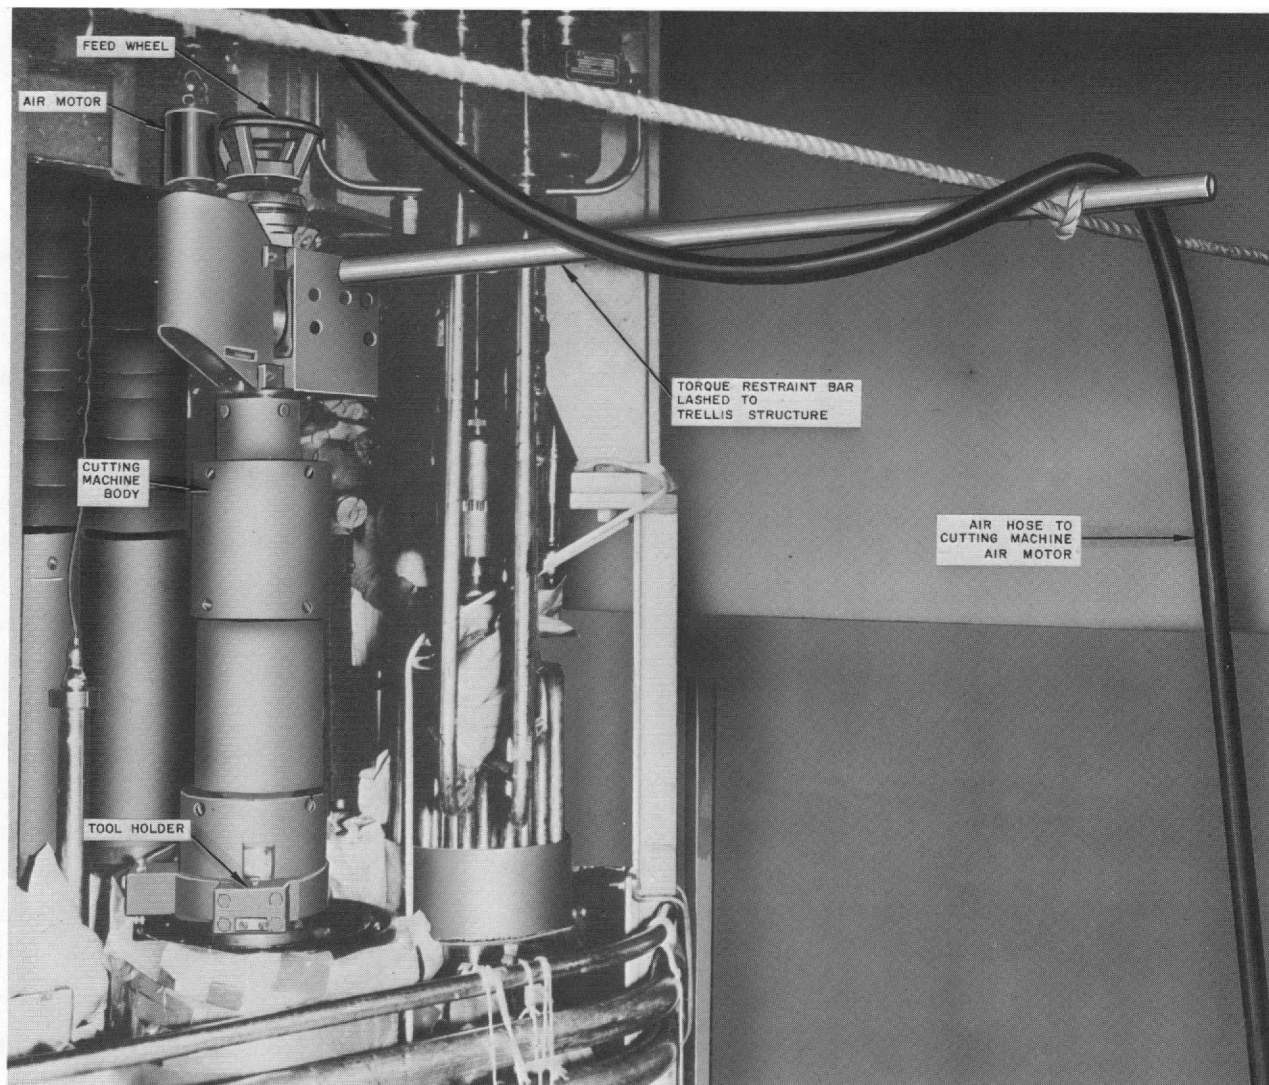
Seal Weld Cutting Machine on Fuel Port B-6.
